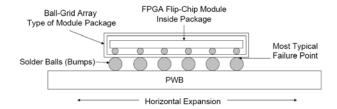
FPGA Package, Solder Ball and Printed Wire Board Diagram Showing a Typical Failure Point.
